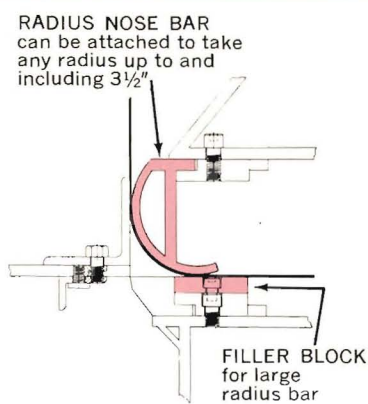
Cross Section, Large Radius Nose Bar used with Filler Block
